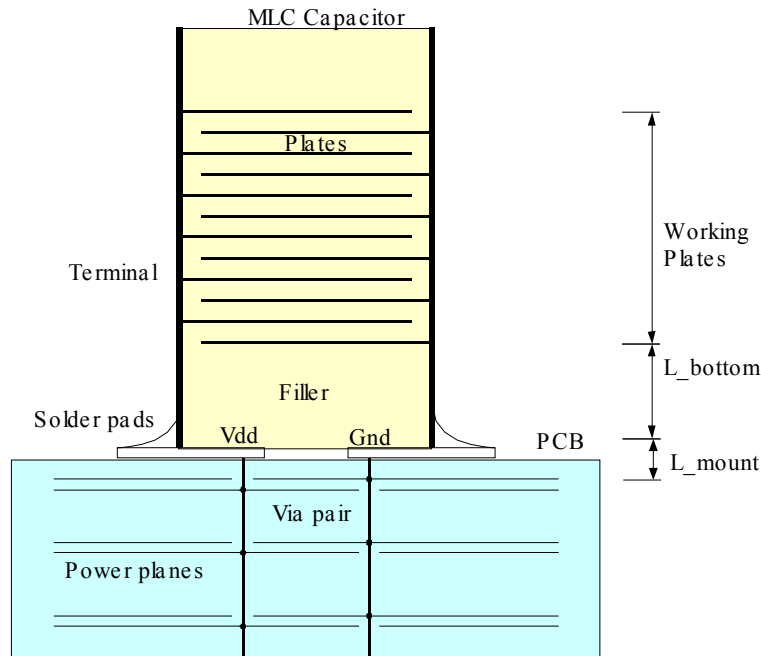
Construction of MLC capacitor mounted on PCB fixture. Inductance is associated with the working plates, the filler plate and the mount.
